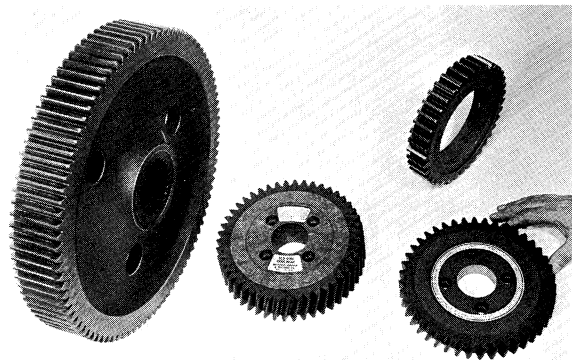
A large spur gear (left) with its No. 32 Mix Red Ring honing tool used to correct parallelism and size. At the right is a helicopter drive gear whose adjacent No. 7 mix AA-tolerance honing tool provided an 8-mu surface finish and 0.0003-in. accumulative tooth spacing error.
